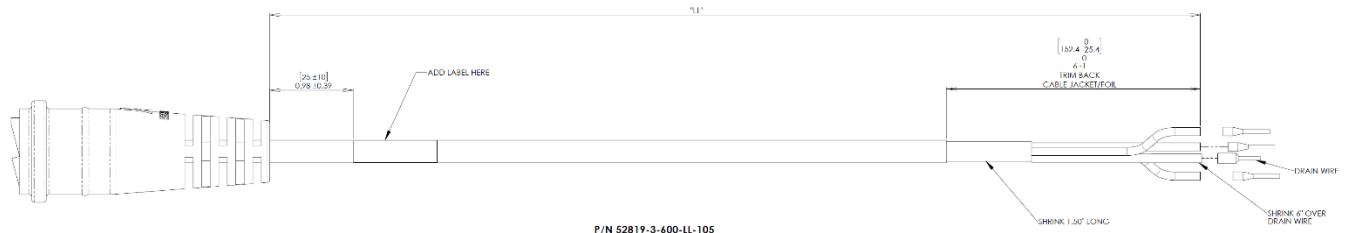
Current lamp cable assembly 52819-3-600-LL-105
